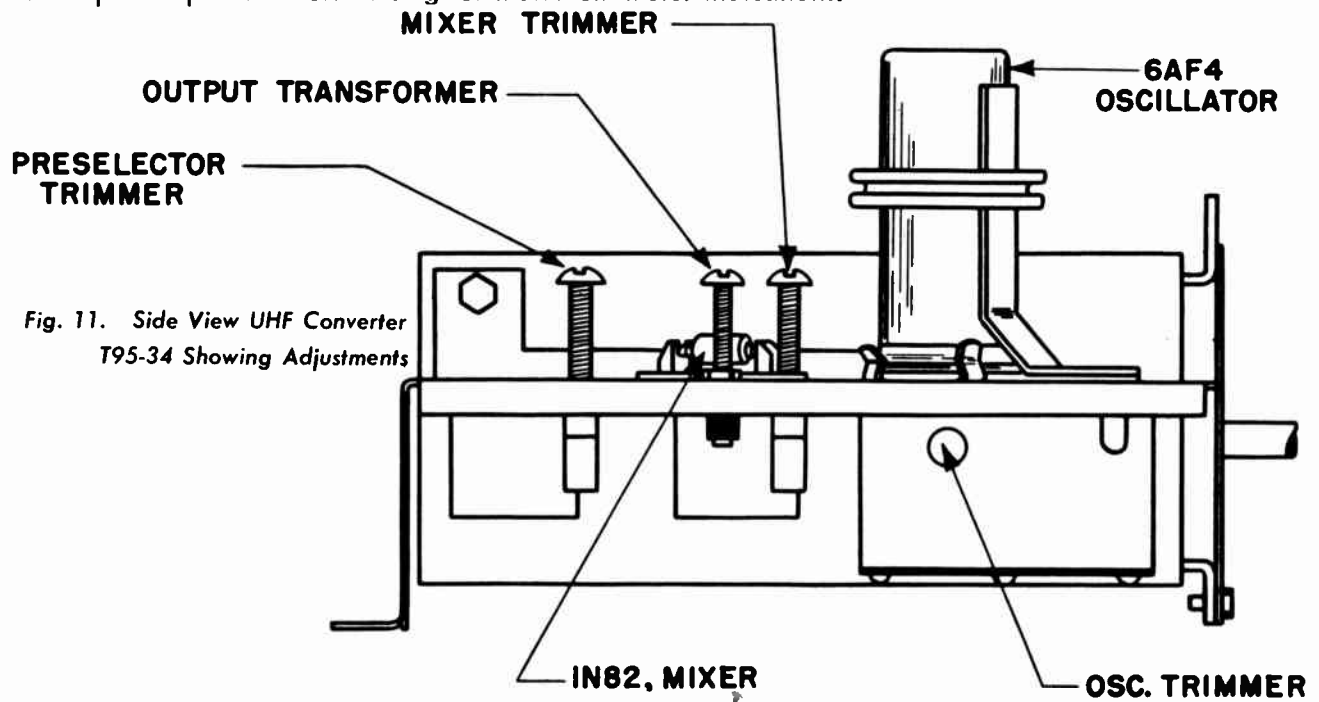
Side View UHF Converter T95-34 Showing Adjustments
